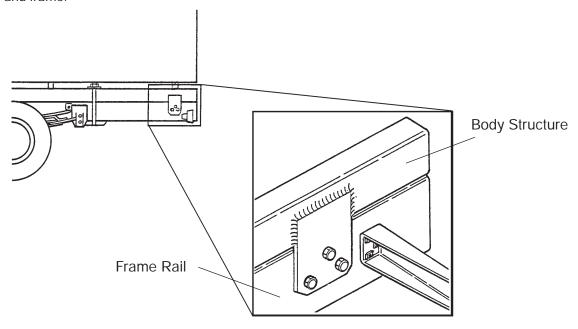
Example of Fishplate Bracket at Rear End of Body, used with U-Bolts
